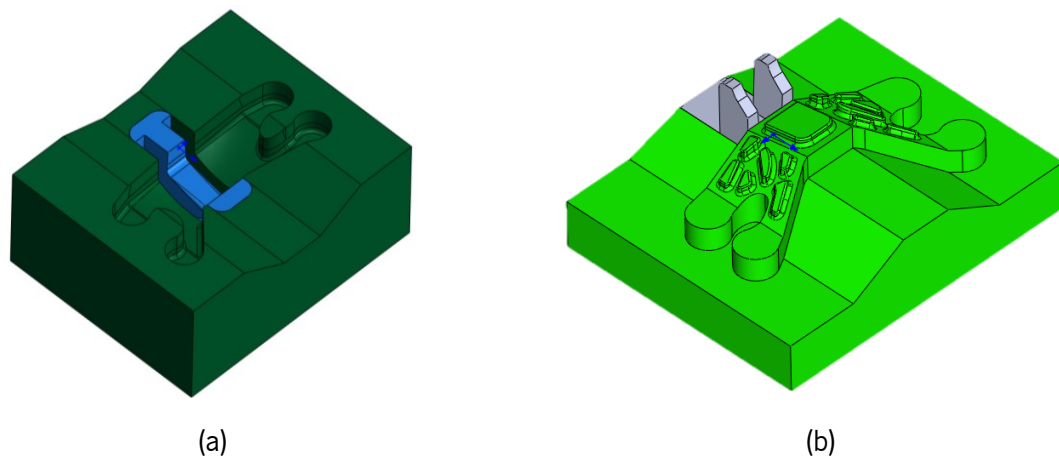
A CAD of the two sides of the mould are given in (a) and (b), a deviant colour is used to show the moulds insert to facilitate the manufacturing of the moulds
